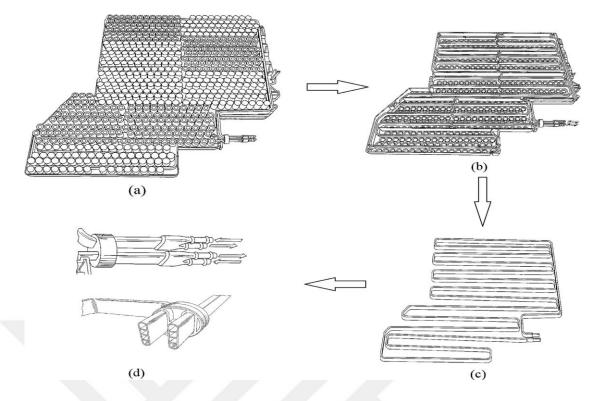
Schematic of liquid BTMS used in Tesla: (a) the cooling tube inter-engaged with a sheet of cells; (b) the cooling tube setup; (c) the cooling tube; (d) the side view and end view of the inlet and outlet [22].
